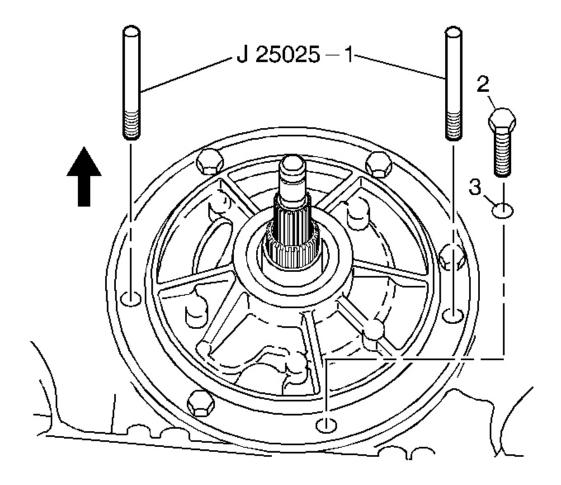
View Of Pump Cover, Case & Gasket Courtesy of GENERAL MOTORS CORP.
